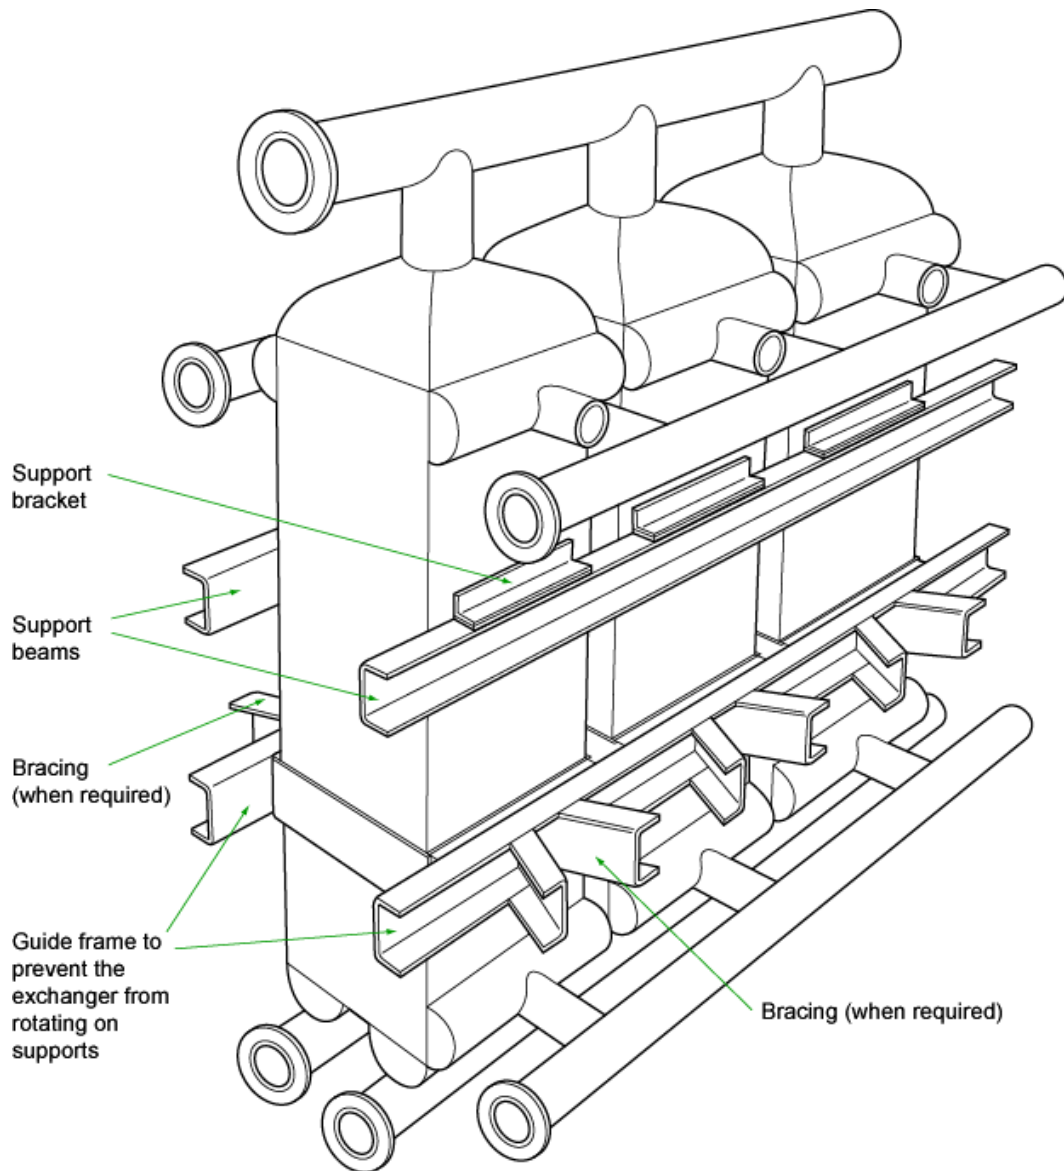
Typical heat exchanger assembly of three cores showing angle bracket supports
